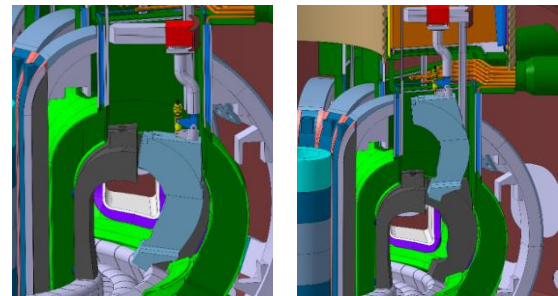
Left: Blanket Segment Tilting and Extraction; Right: Blanket Segment Lifting
